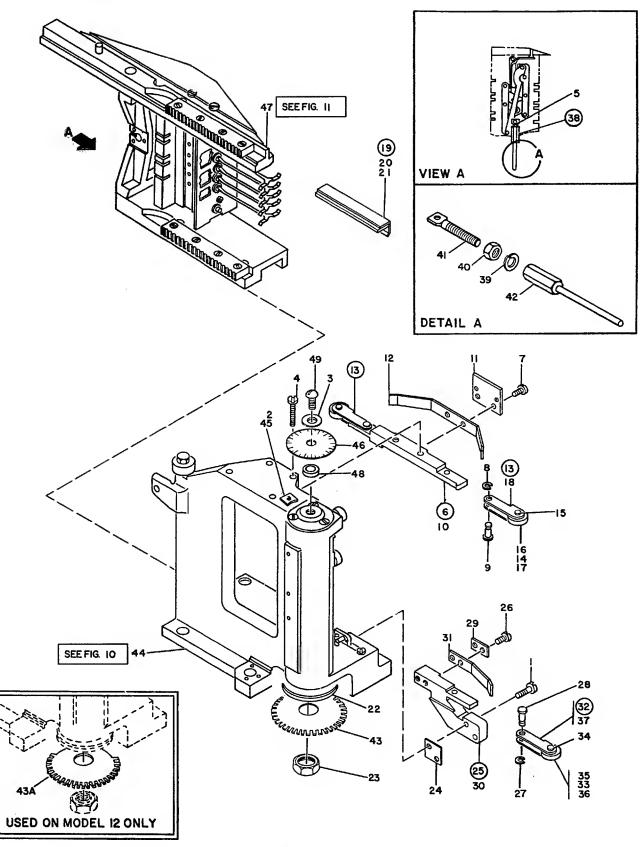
CARRIAGE AND CARRIAGE HOUSING ASSEMBLY. SEE LIST 9.
